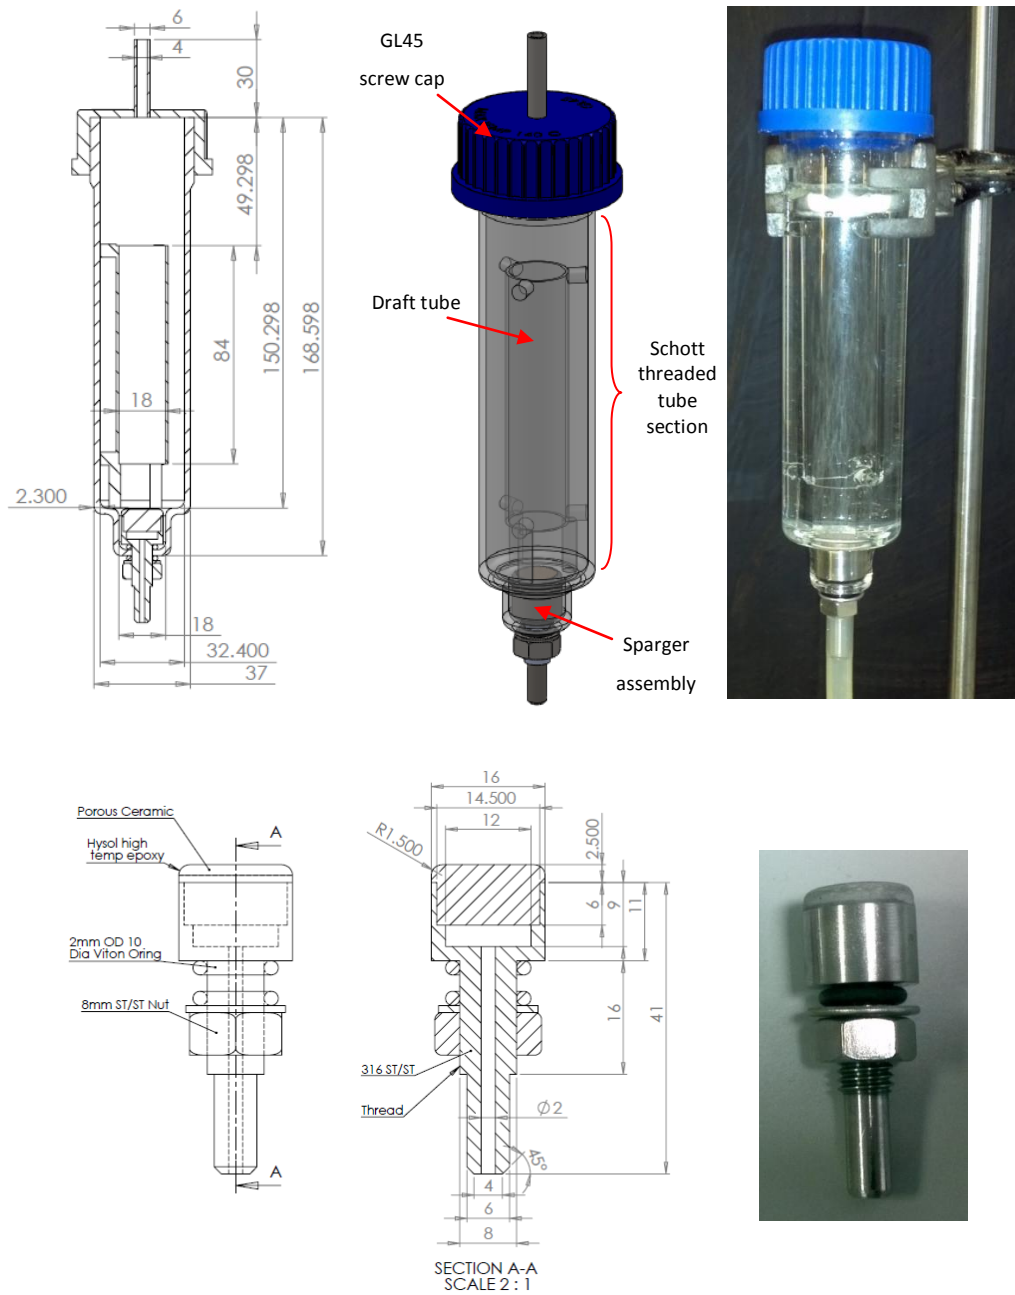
Top (left to right) Mk II mini photo-bioreactor: Technical drawing, annotated Solidworks model assembly and physical prototype. Bottom (left to right) Mk II mini photo-bioreactor sparger: Technical drawing and physical prototype.
